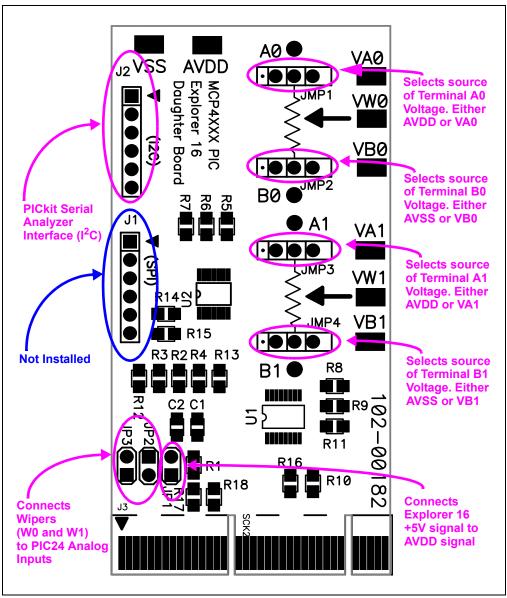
MCP46XX Explorer 16 Daughter Board Demo Board Connectors.
